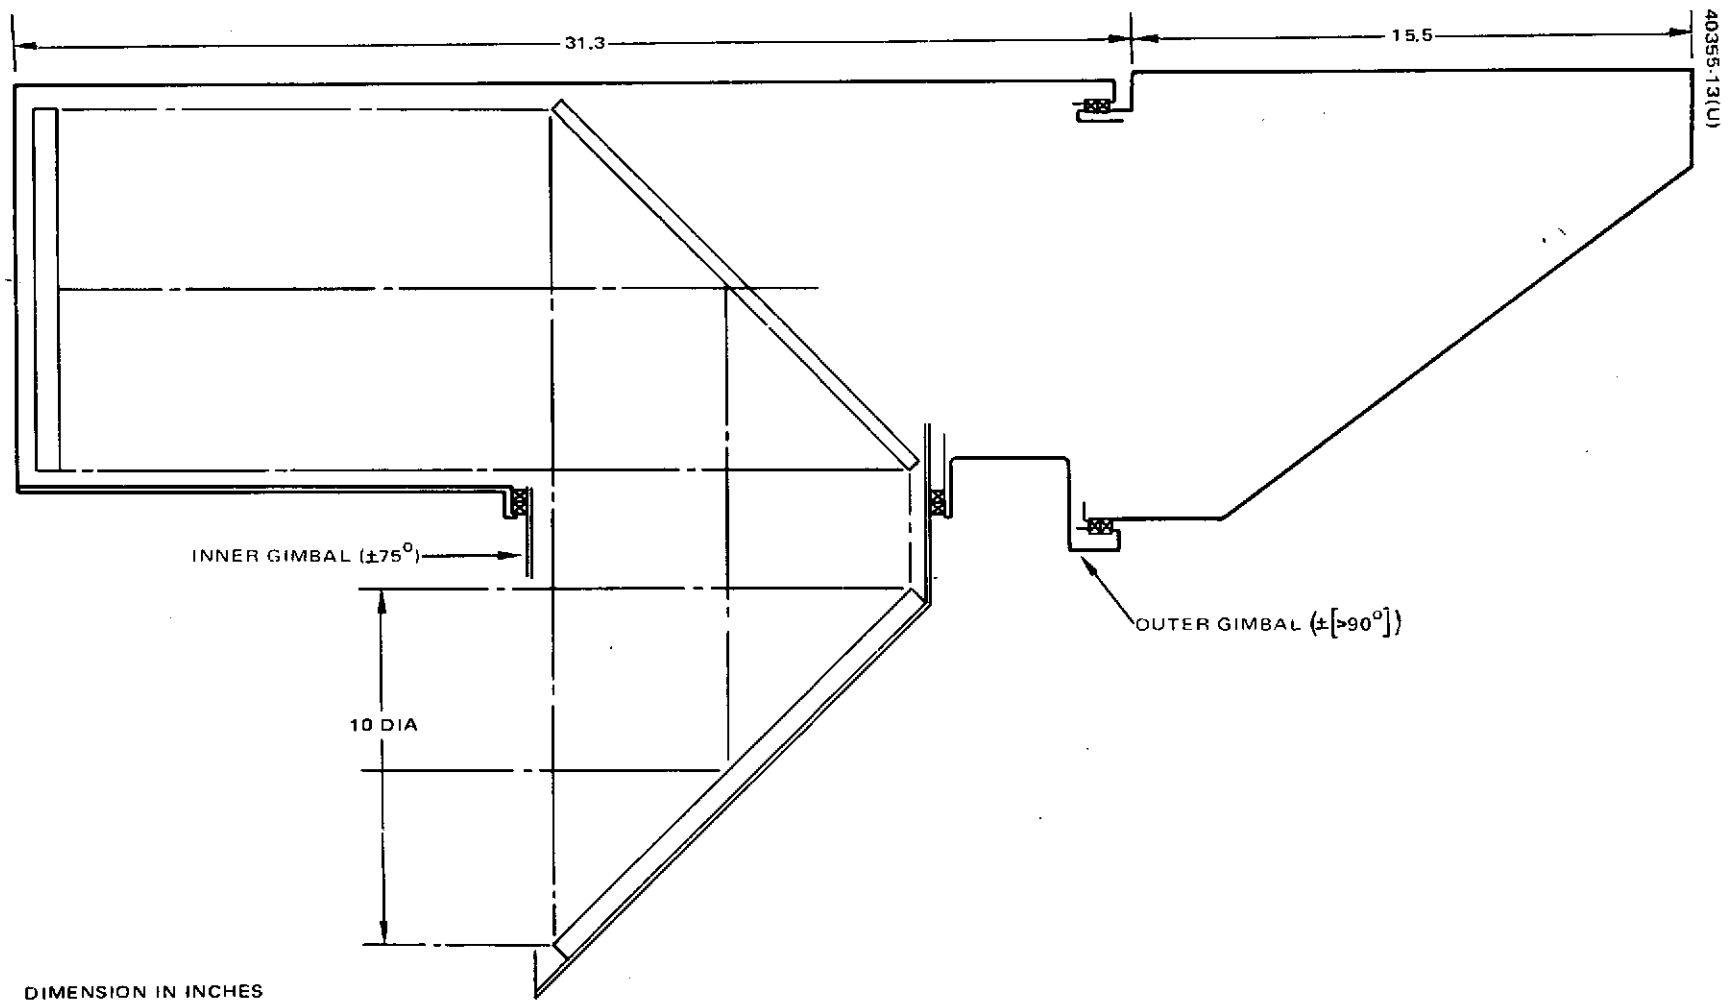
PACKAGE B - 10 INCH OPTICS F/2 SYSTEM, LARGER OUTER GIMBAL BEARING
